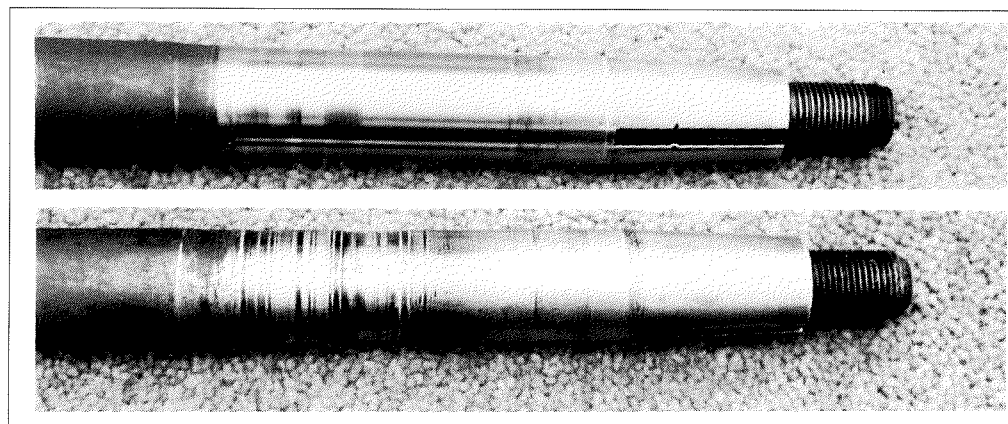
With the housing removed all is revealed. Hope that the shaft looks like the one at the top and not the one at the bottom where the needle bearing has obviously failed and caused serious damage. Check also that the shaft, new or second hand isn't bent. You don't want to reassemble everything as I once did, only to find I had a wobbly wheel (Steve!)
